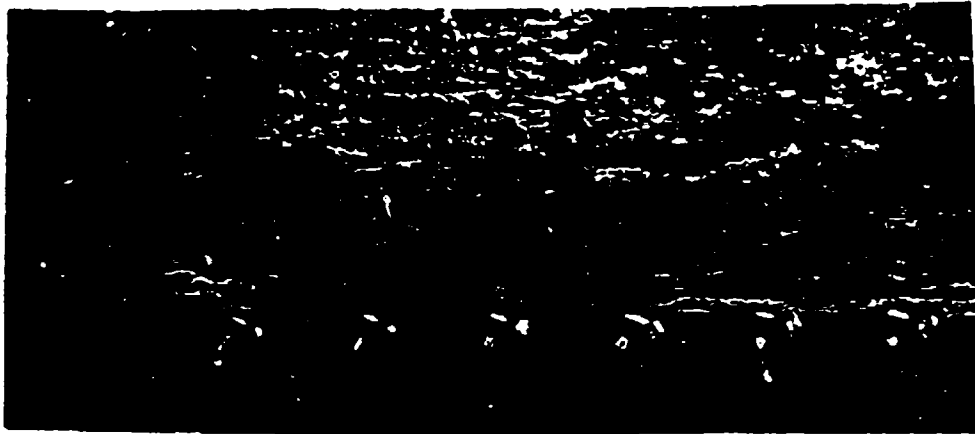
Ultraviolet light photograph of magnetic particle indications of stress corrosion cracking in 155-mm tube #193 in thread sector fillet, see location a in Figure 9 (2X).
